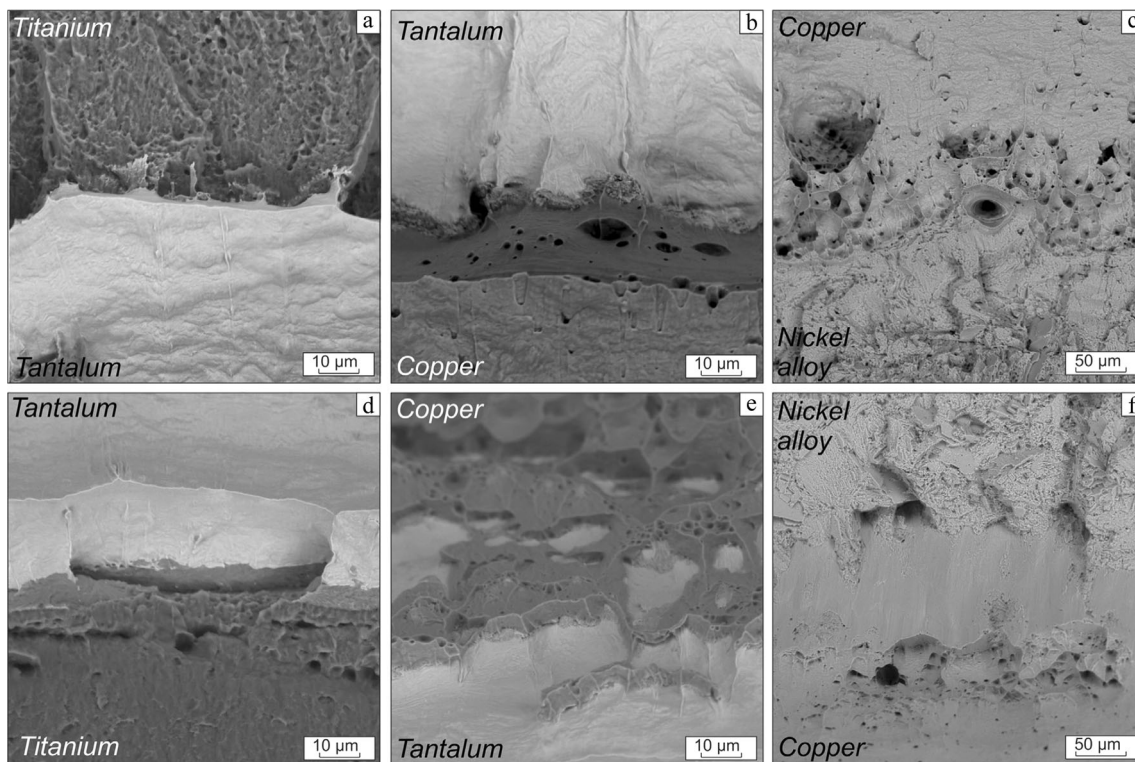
Fracture surfaces of the composite materials with copper plate 0.3 mm thick after the three-point bending tests. The titanium plates were subjected to tensile (a–c) and compressive (d–f) loads
